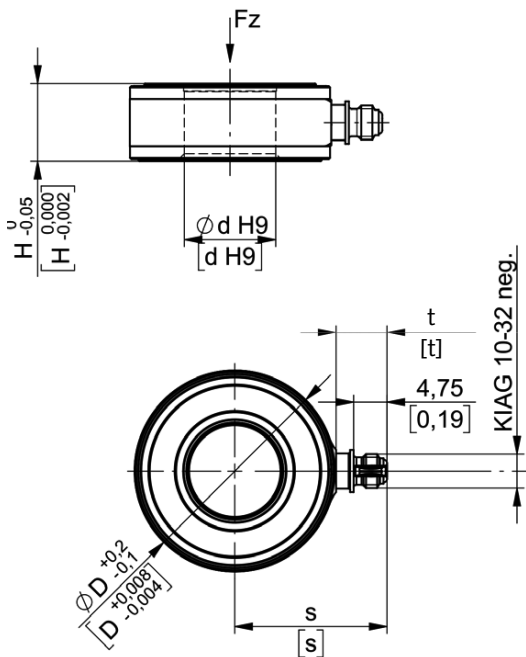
Dimensions Type 9001C ... 9071C in mm [in]
